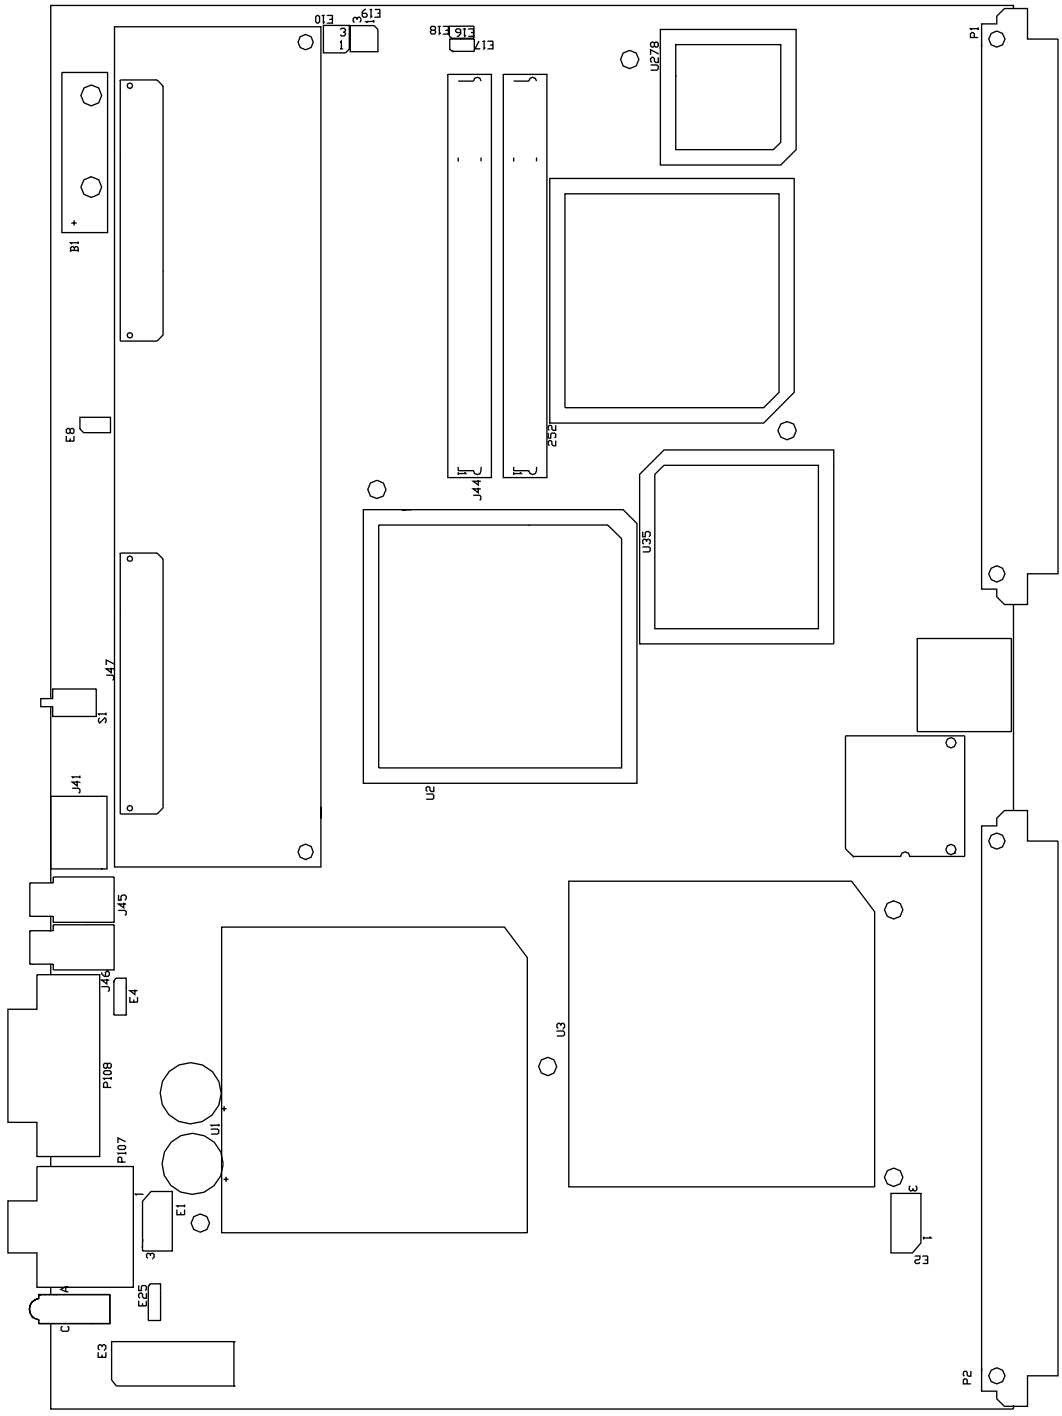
VMIVME-7765 (Bottom Board) Jumper Locations
